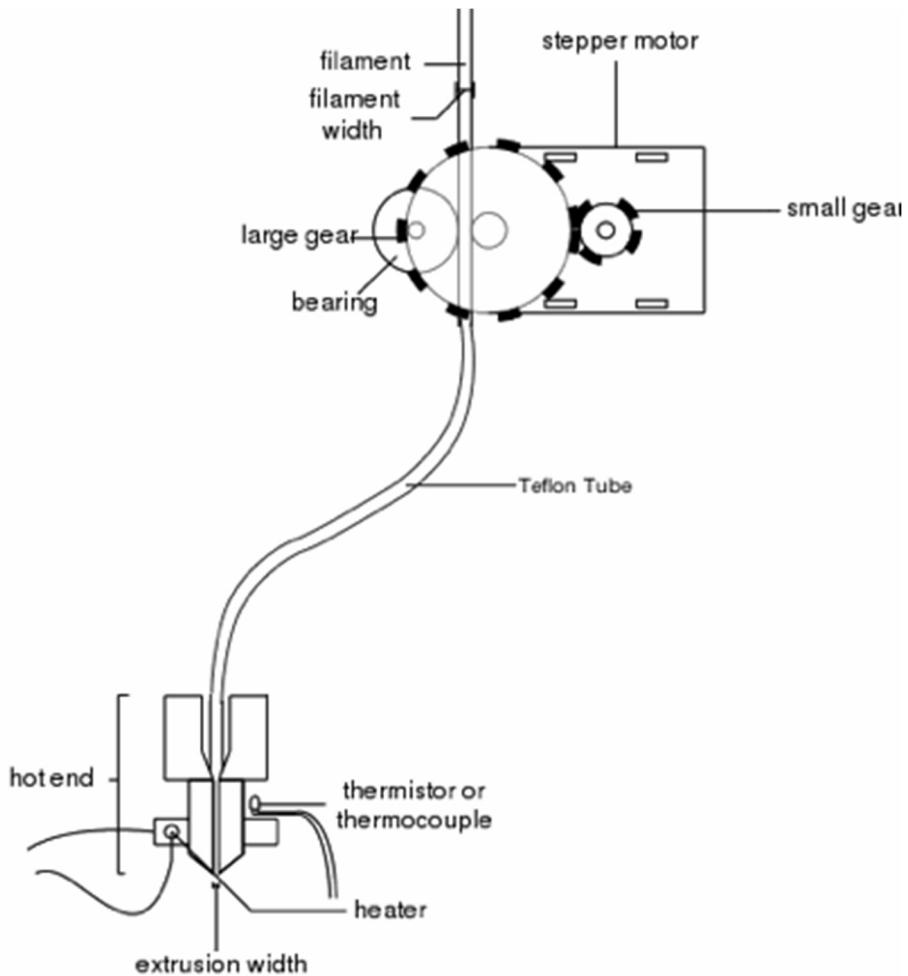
Bowden Extruder setup [© Fargo3dprinting.com]
